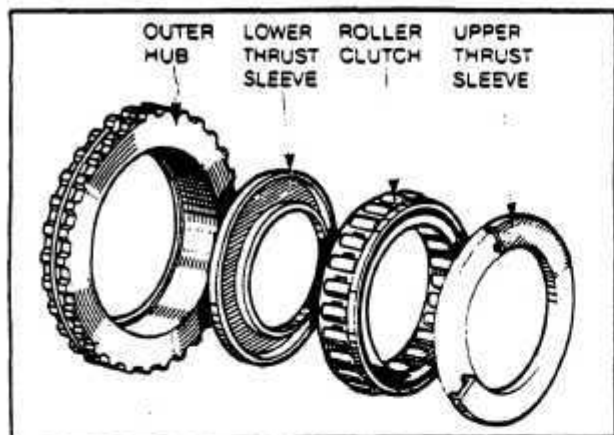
ROLLER CLUTCH DISASSEMBLED
